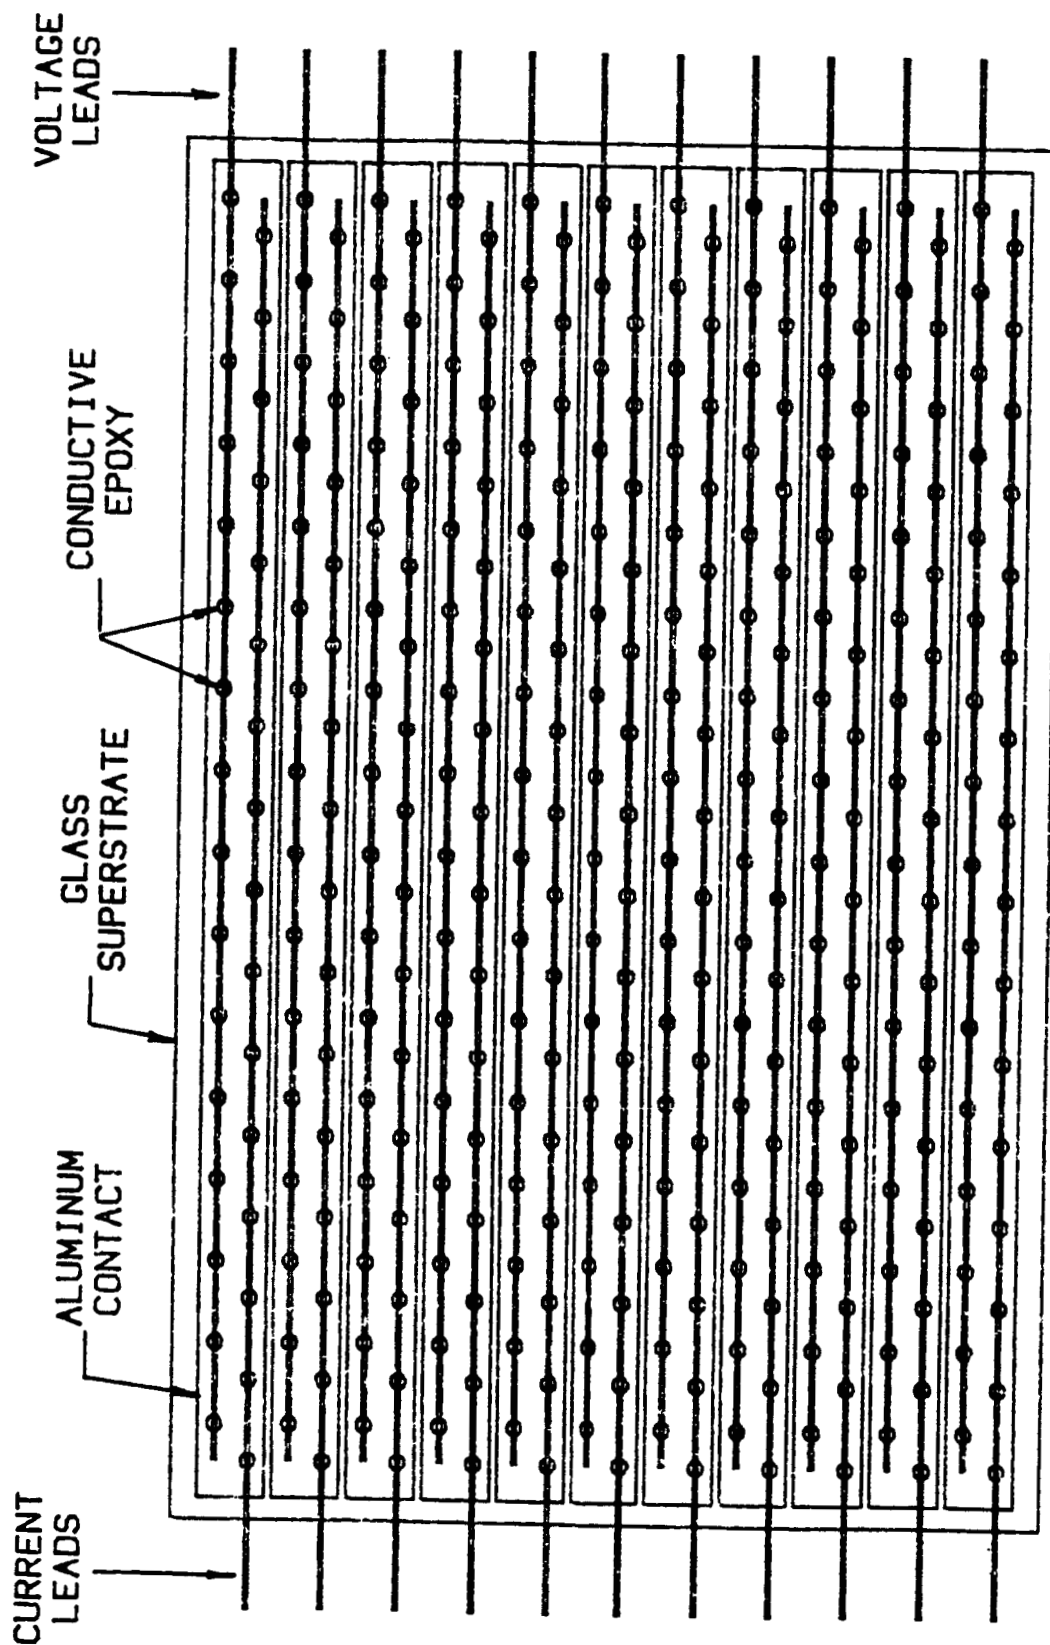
Bottom view of Module Showing Epoxy Lead Attachment
